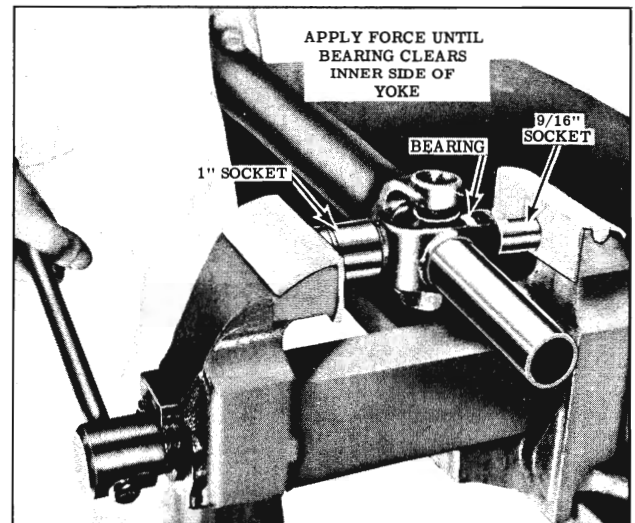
Pressing Bearing From Yoke (Spicer)
